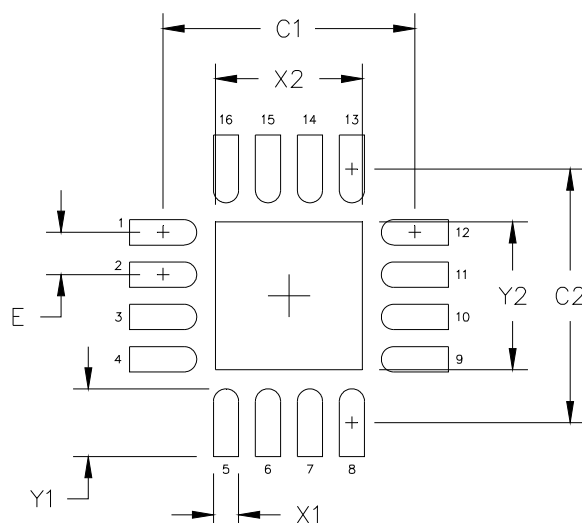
Si53340 3x3 mm 16-QFN Package Land Pattern
